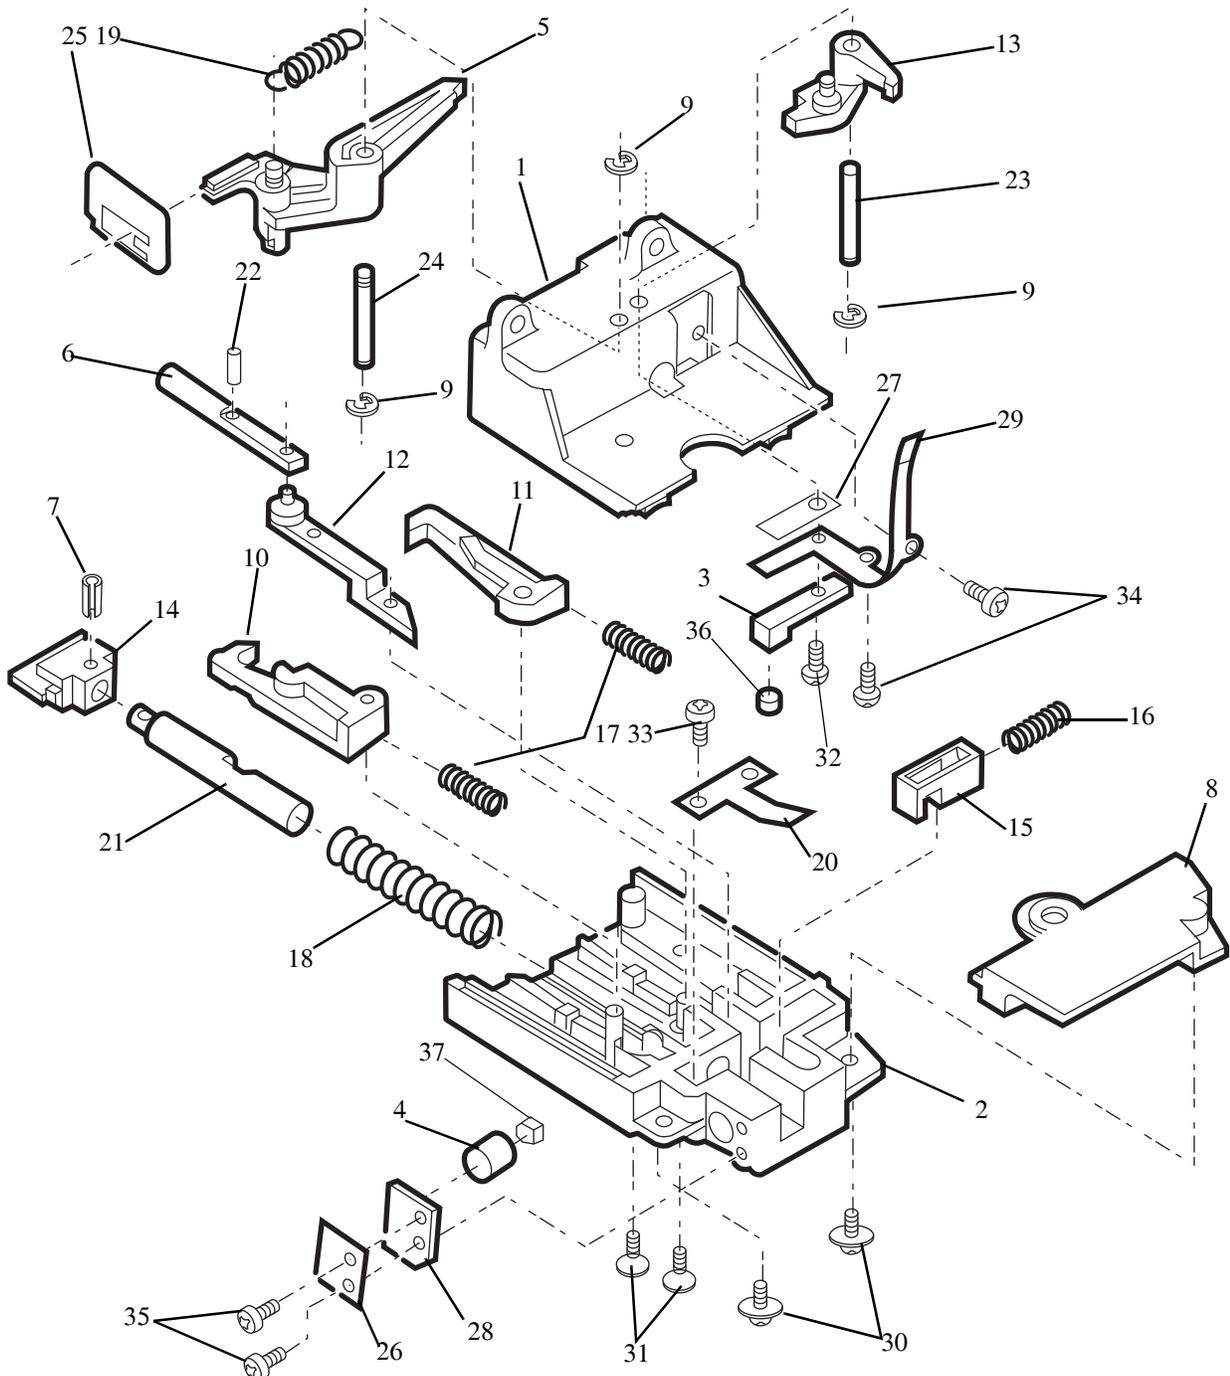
Safety/Slide Clamp Assembly (CCRA1006.A)
